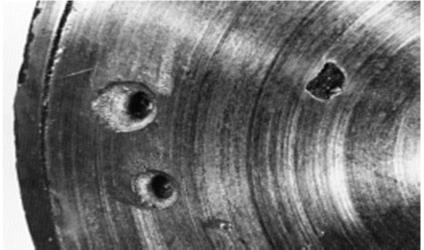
Pitting corrosion on the impeller (Cebeci, 2016).
